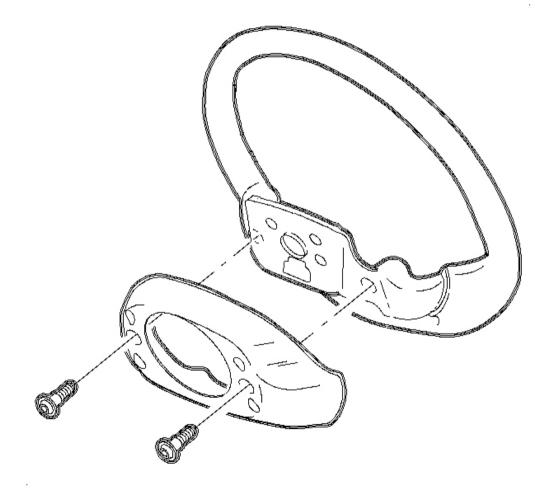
Installing Steering Wheel Shroud & Screws Courtesy of GENERAL MOTORS CORP.
